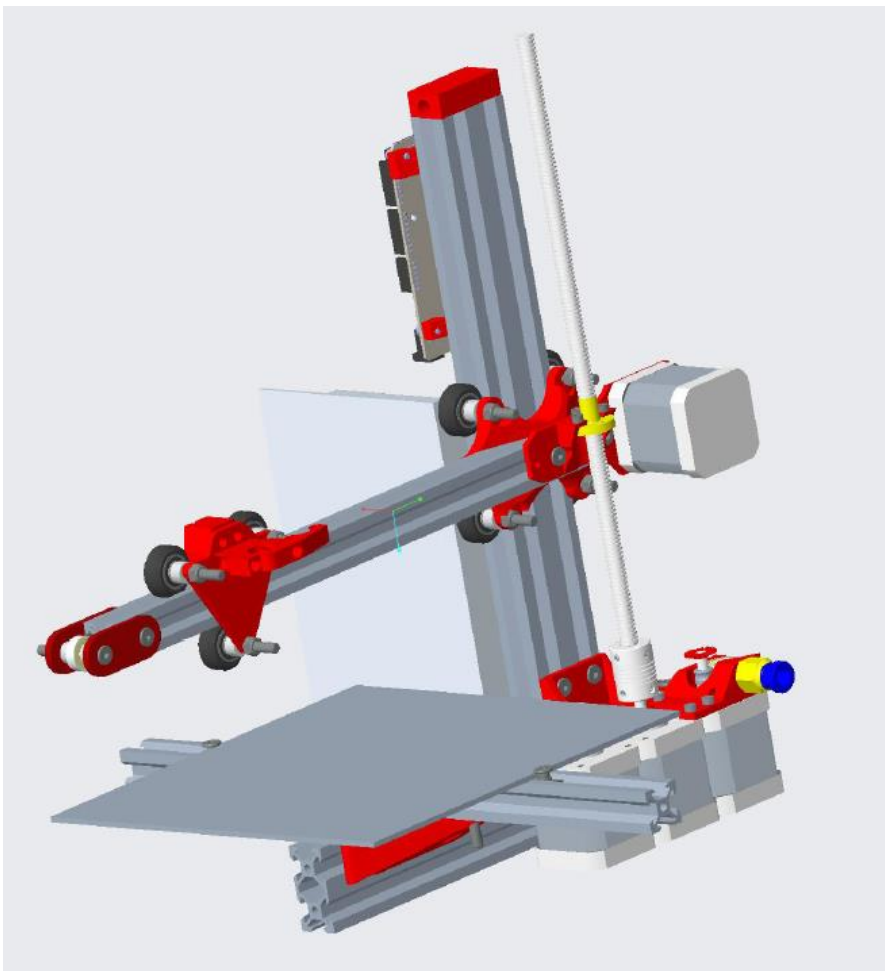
Final CAD assembly of 3-D low cost printer meeting all design requirements.
